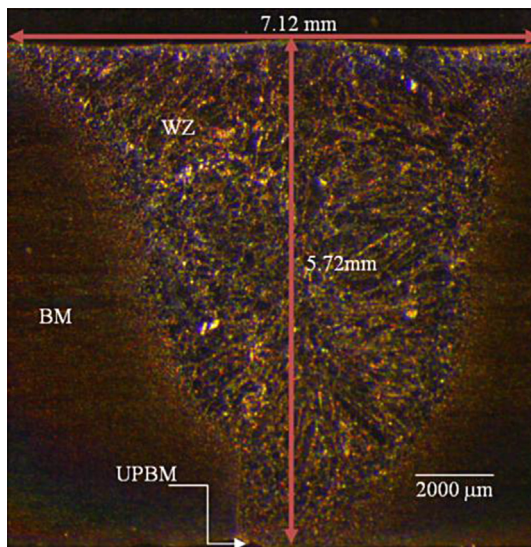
Macrostructure of the joints revealing the width of the weld bead and depth of penetration for DSS Joints fabricated using the optimized process parameters as illustrated in Table 8 (WZ :weld zone; BMZ : base metal zone; UPBM: unpenetrated base metal).
